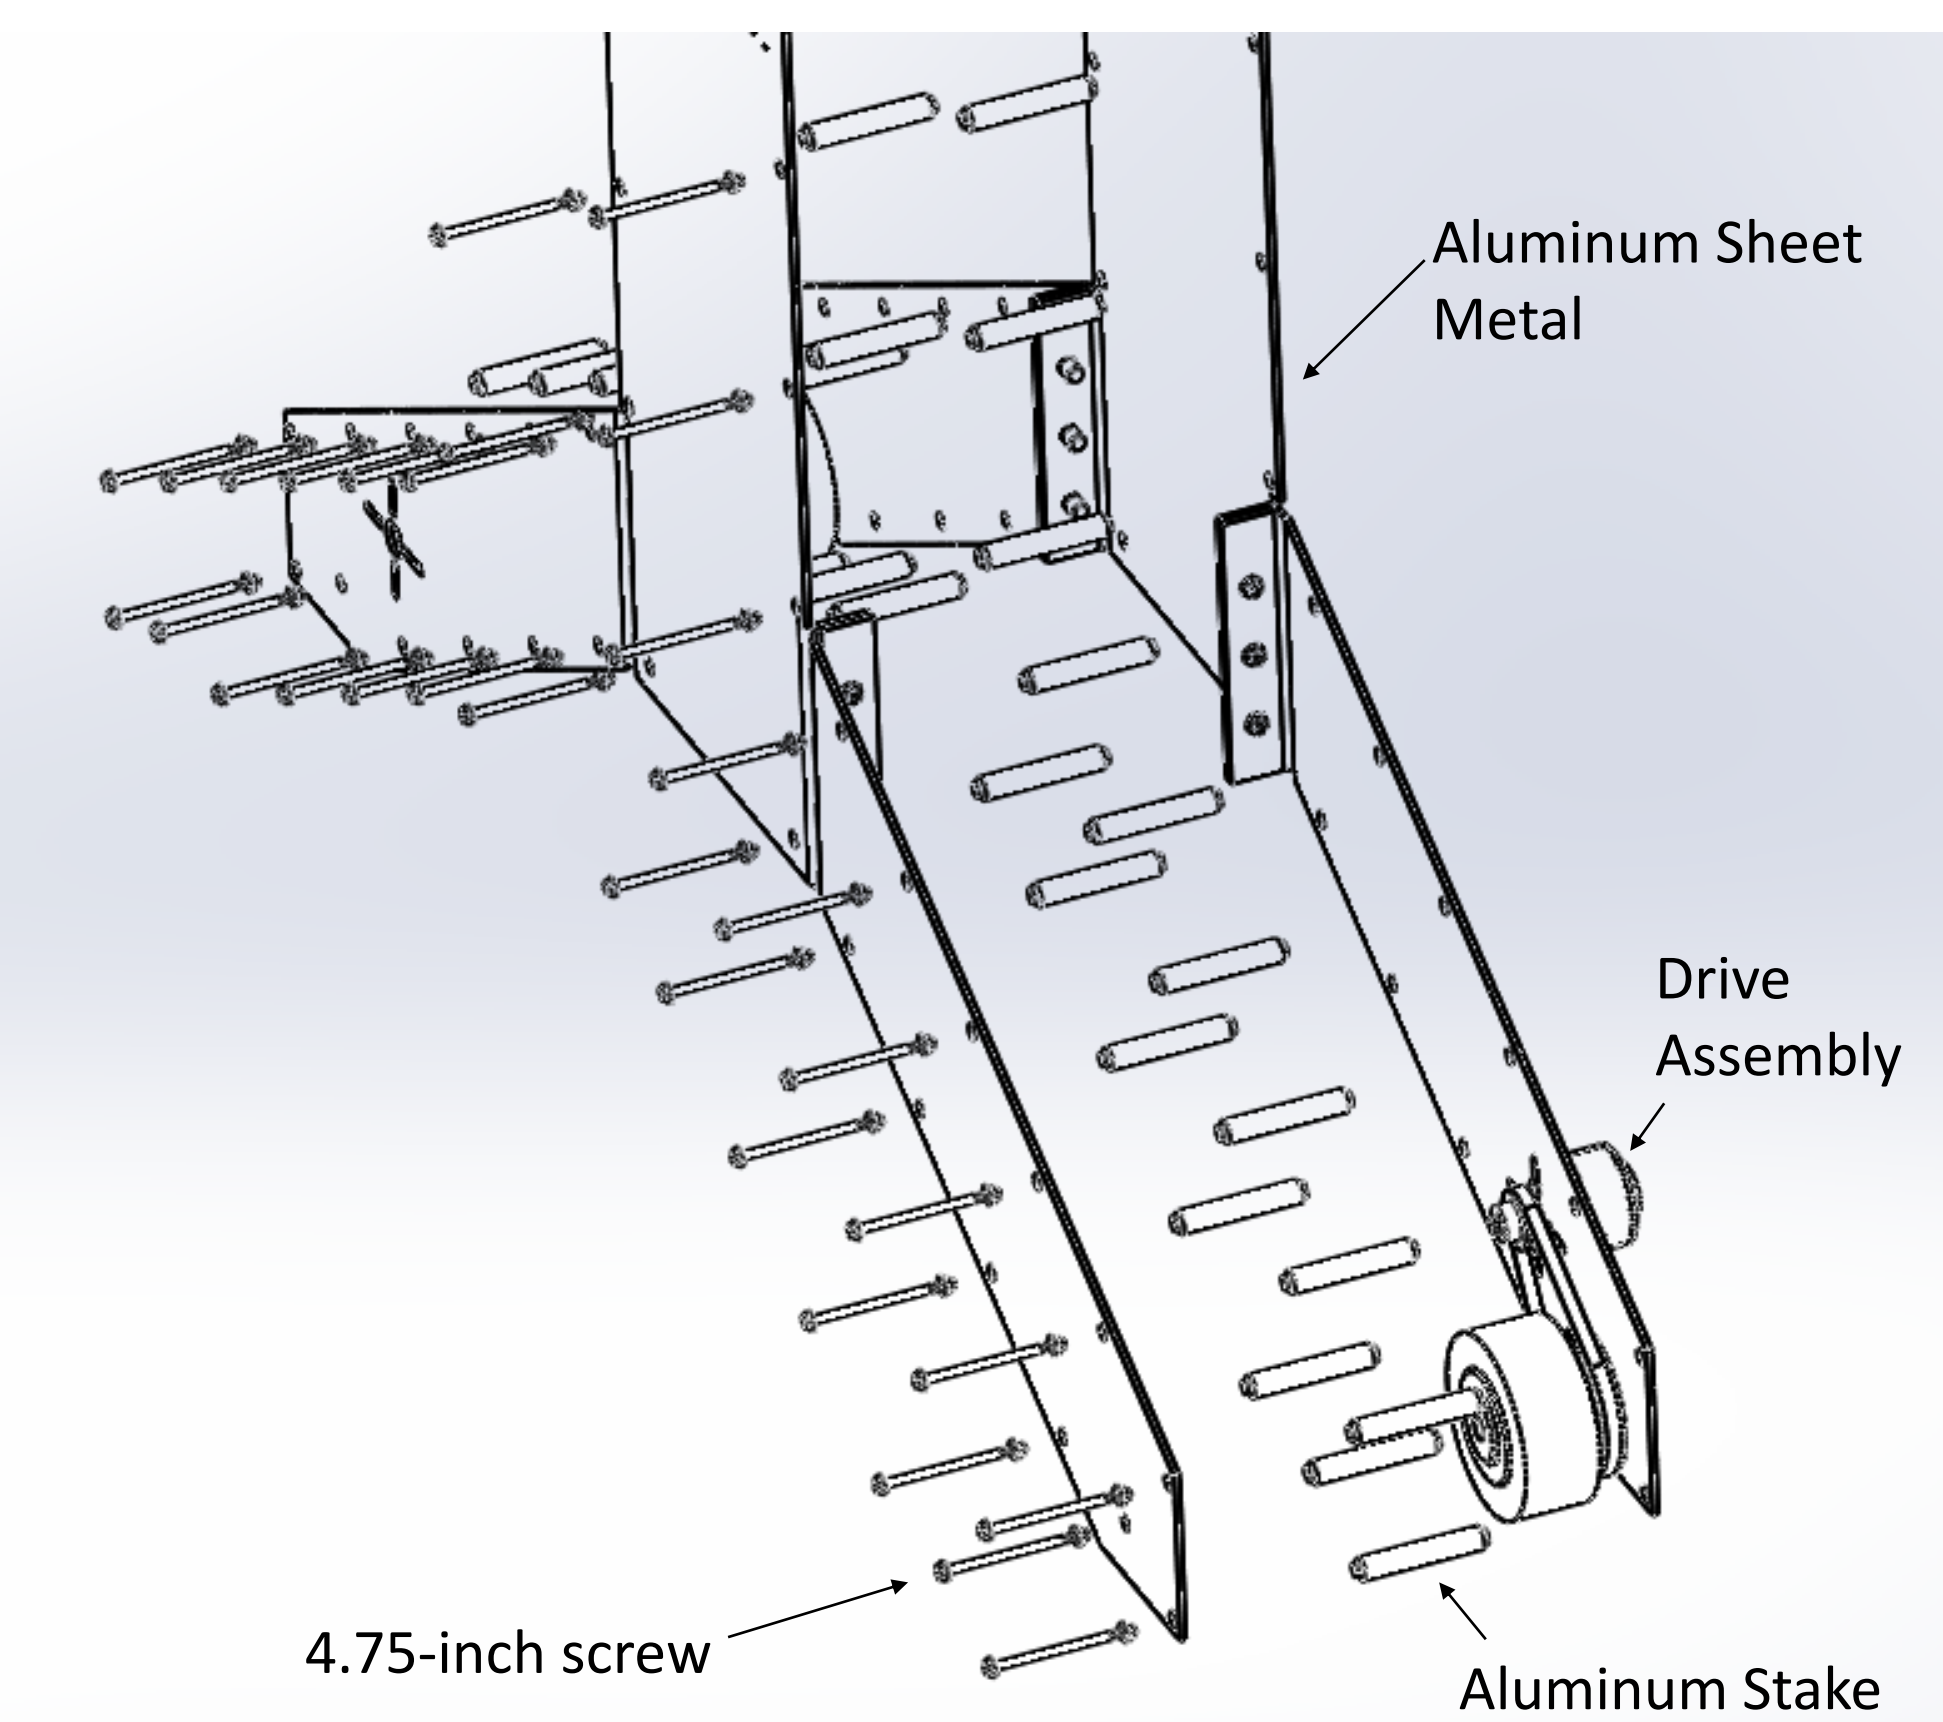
Upright assembly that makes up the frame subsystem. Uses stakes and bolts to hold the aluminum Sheetmetal together
